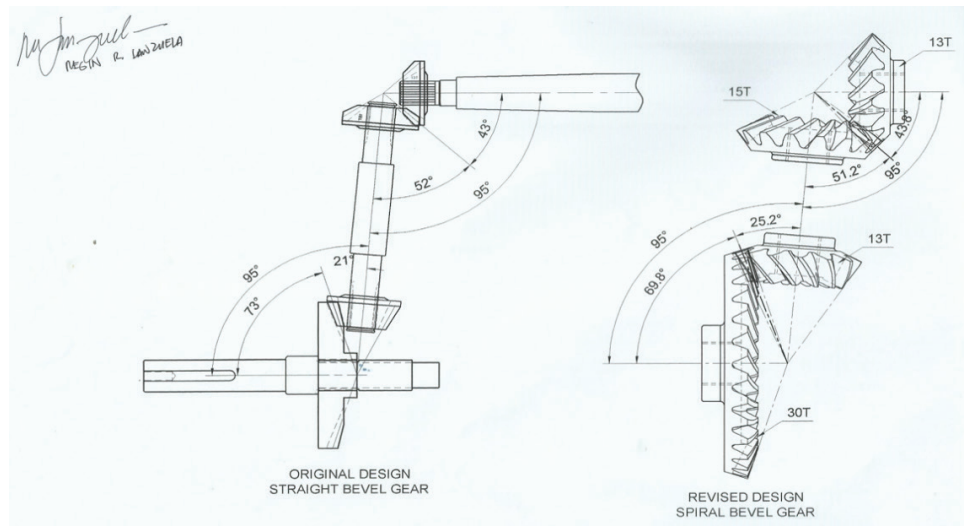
Front Transmission Sub-Assembly Between Original and Revised Bevel Gear Design
